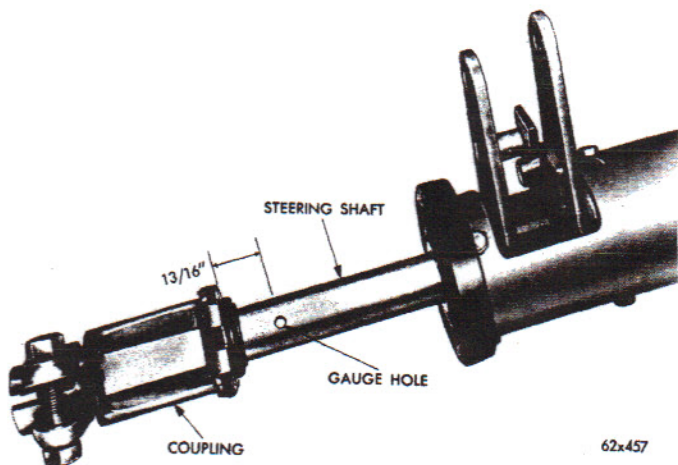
Positioning Steering Shaft Coupling (Manual Steering and Standard Transmission)
